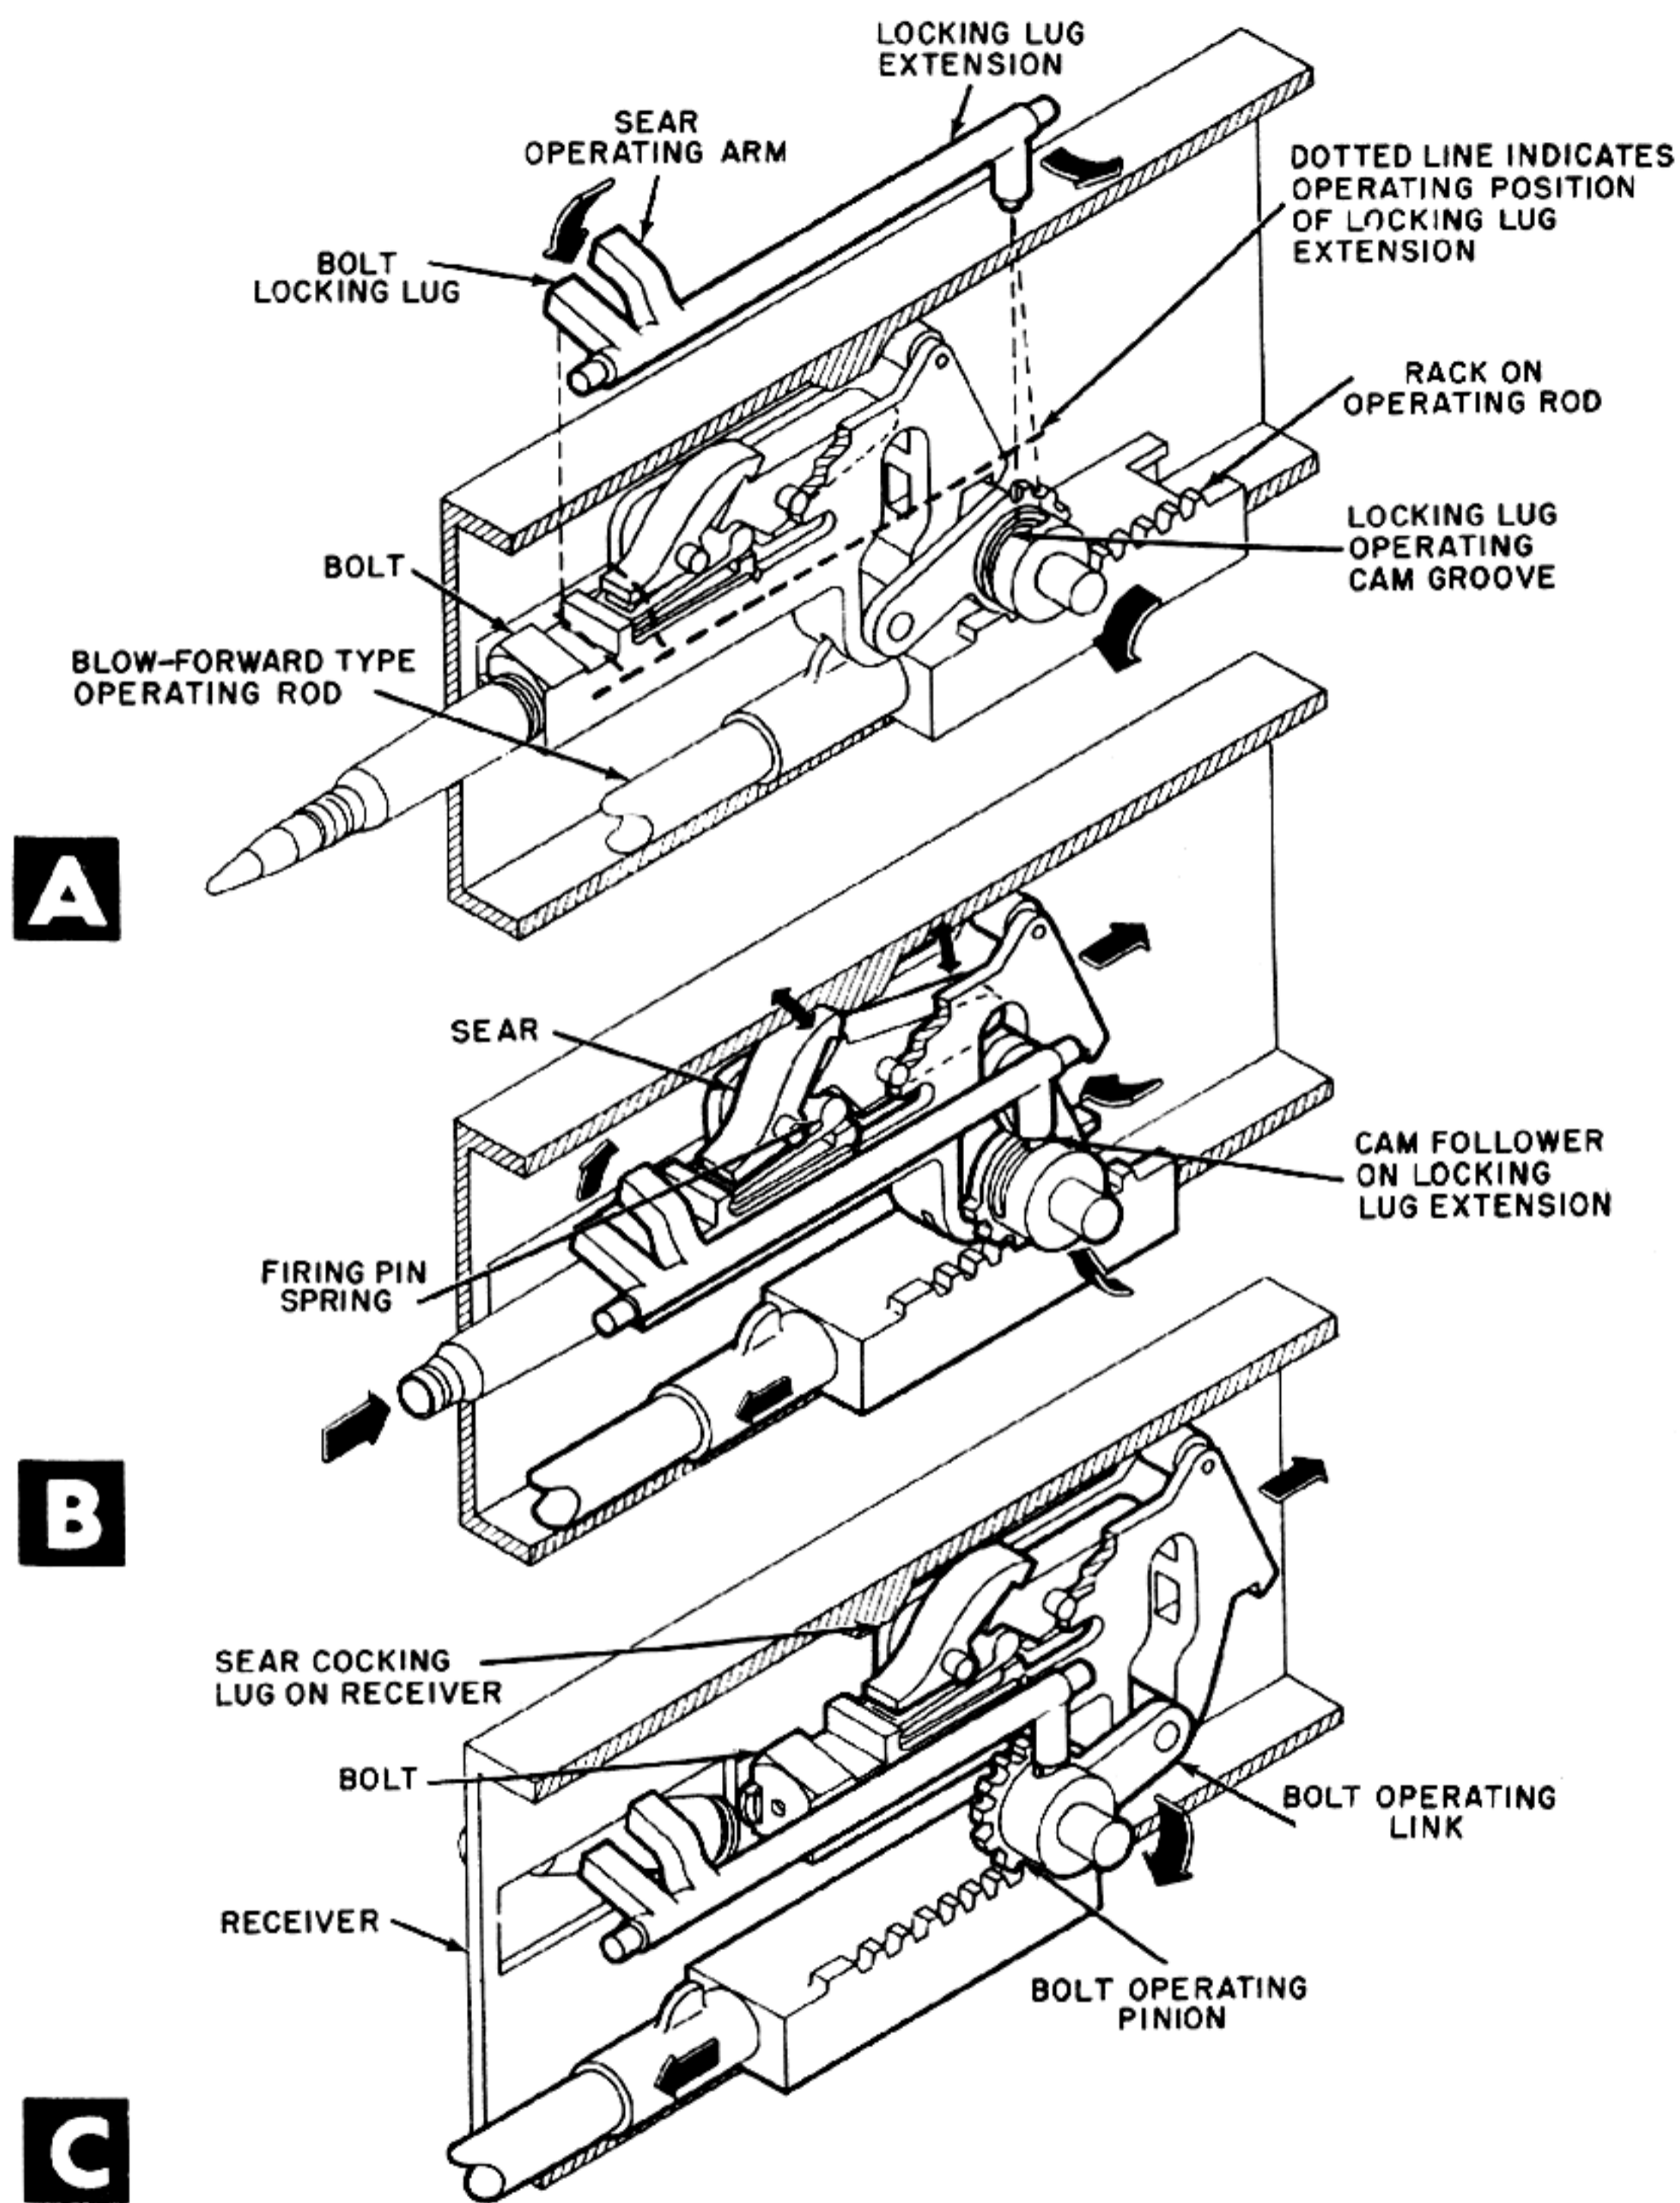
Cam Groove on Pinion Unlocks Bolt.
